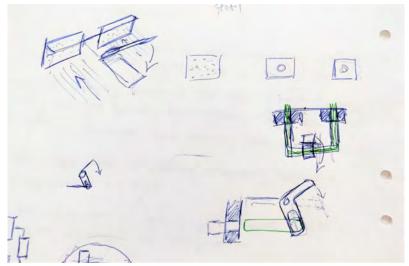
Sketch of Häftpistol concept. The concept uses similarities to a stapler as the means for fastening mechanism. By pushing a lever, a staple shaped part locks the fin into place.
